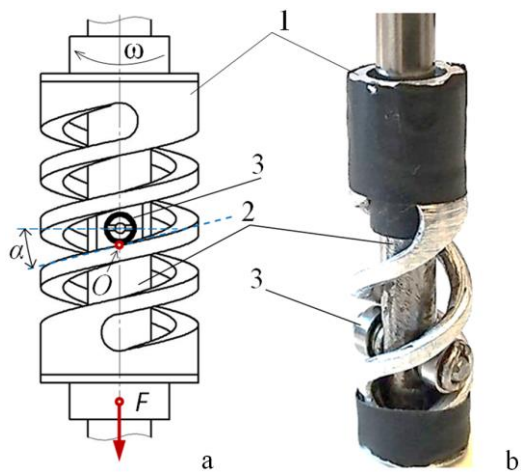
Ball bearing screw mechanism: an idea (a) and embodiment (b)
